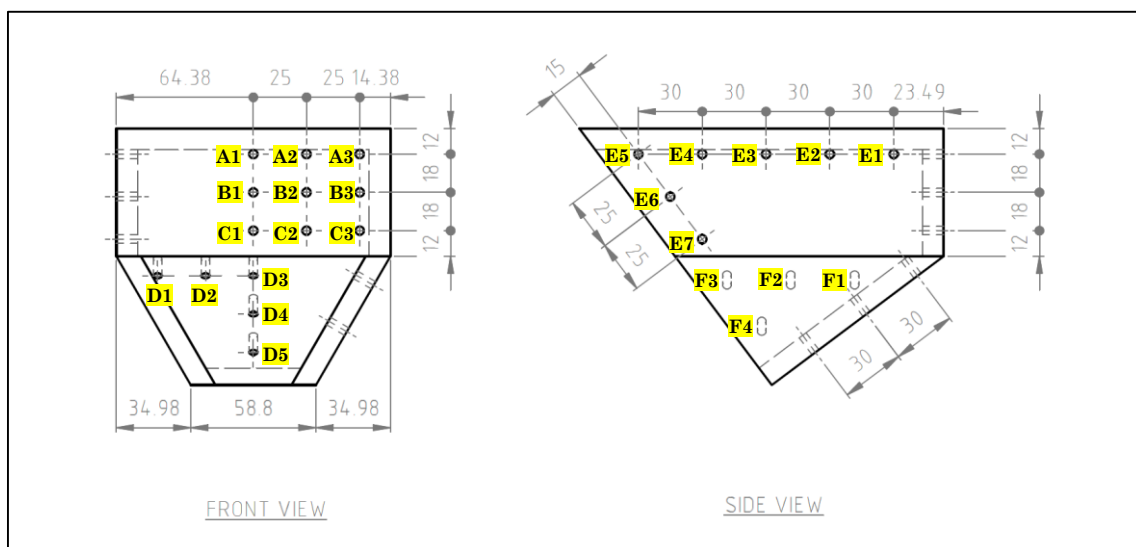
Excerpt from design drawings showing detailed pressure sensor locations
